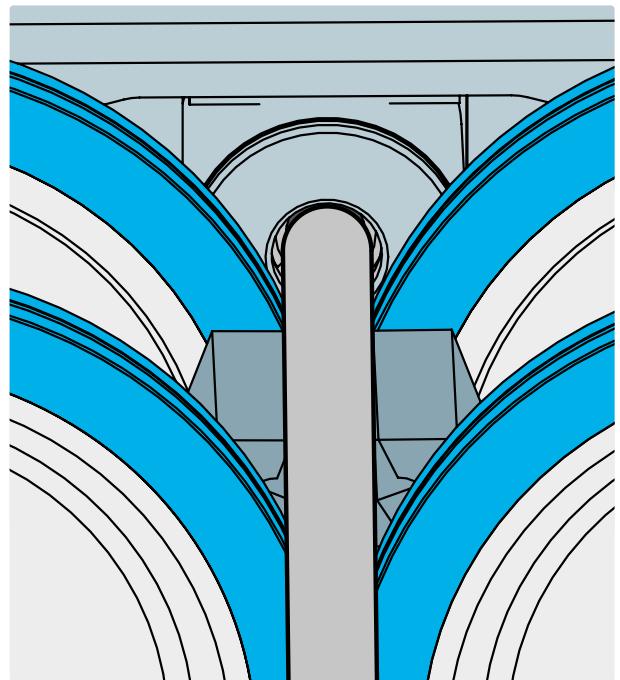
Support-disc bearing (Twindisc bearing) with rotor fitted
